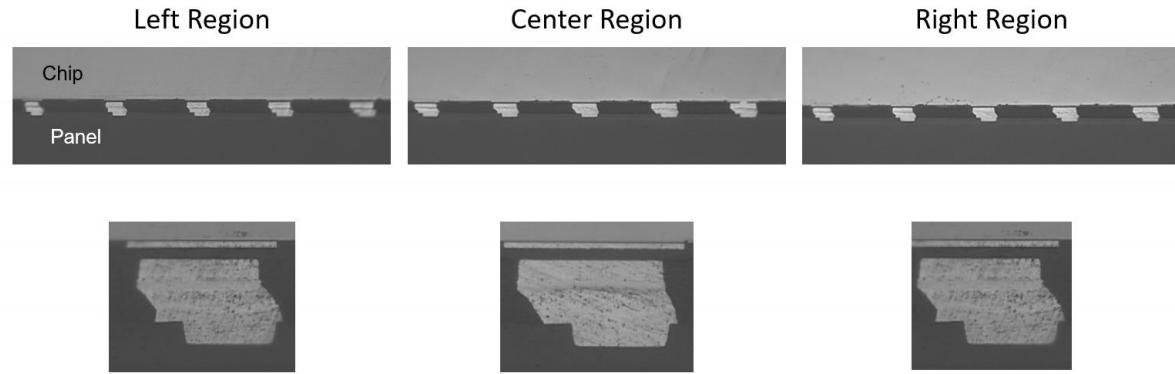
Solder joint cross sections of chips attached to glass panel with RDL.
